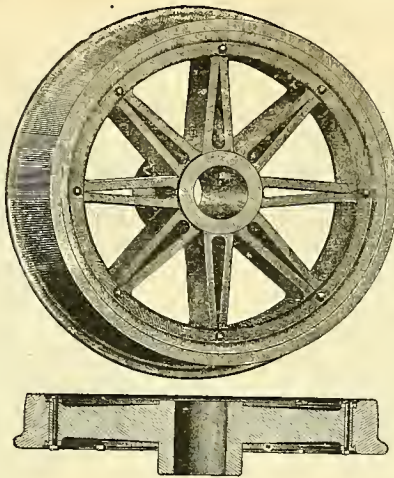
BOIES INTEGRAL TIRE-LOCK AND TOOL FOR
